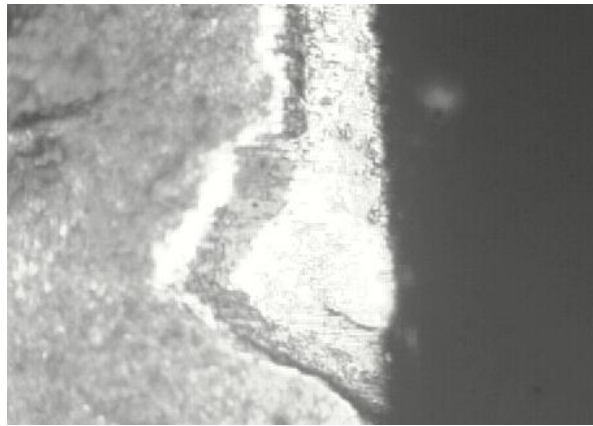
(u) The microscopic view of wear at cutting condition of at spindle speed 800 rpm, feed 0.08 mm/rev and depth of cut 1.2 mm
